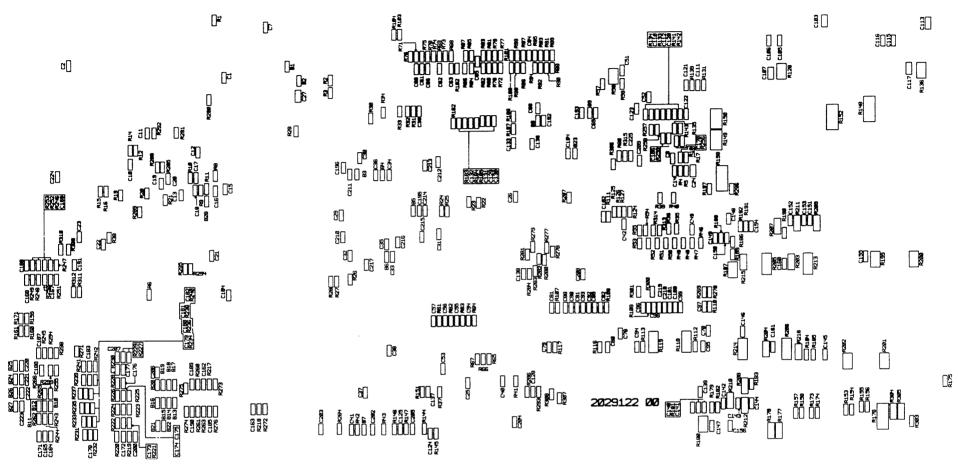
C277MAIN Board Component Layout of Soldering Side
